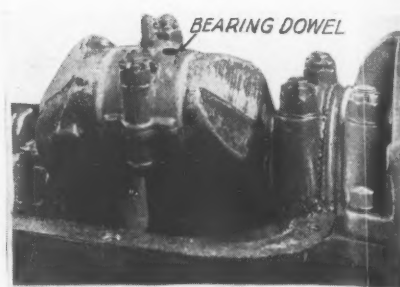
Rod Caps Should be Replaced With Dowel of Bearing-in Cap Facing Timing Gear End of Case so That Oil Scoop Will Face in Right Direction.
